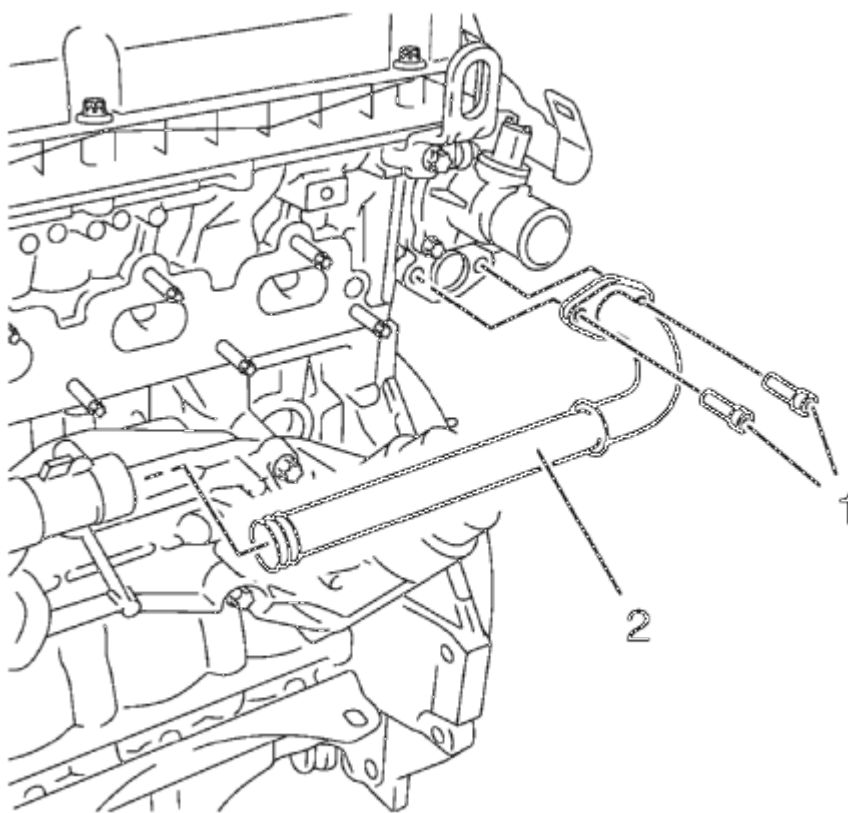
Identifying Engine Oil Cooler Outlet Pipe And Bolts
